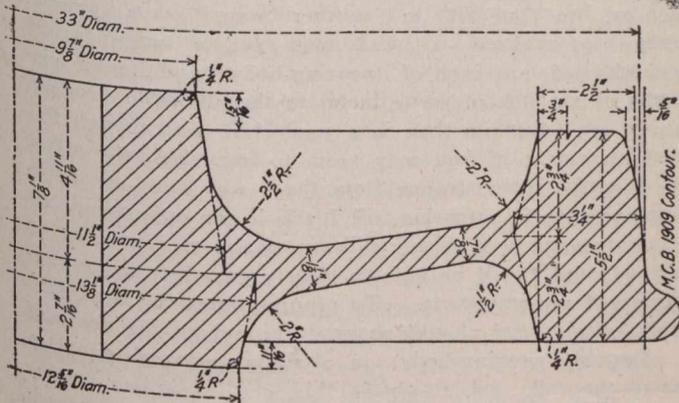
Typical Design of Solid Steel Engine Truck Wheel.
